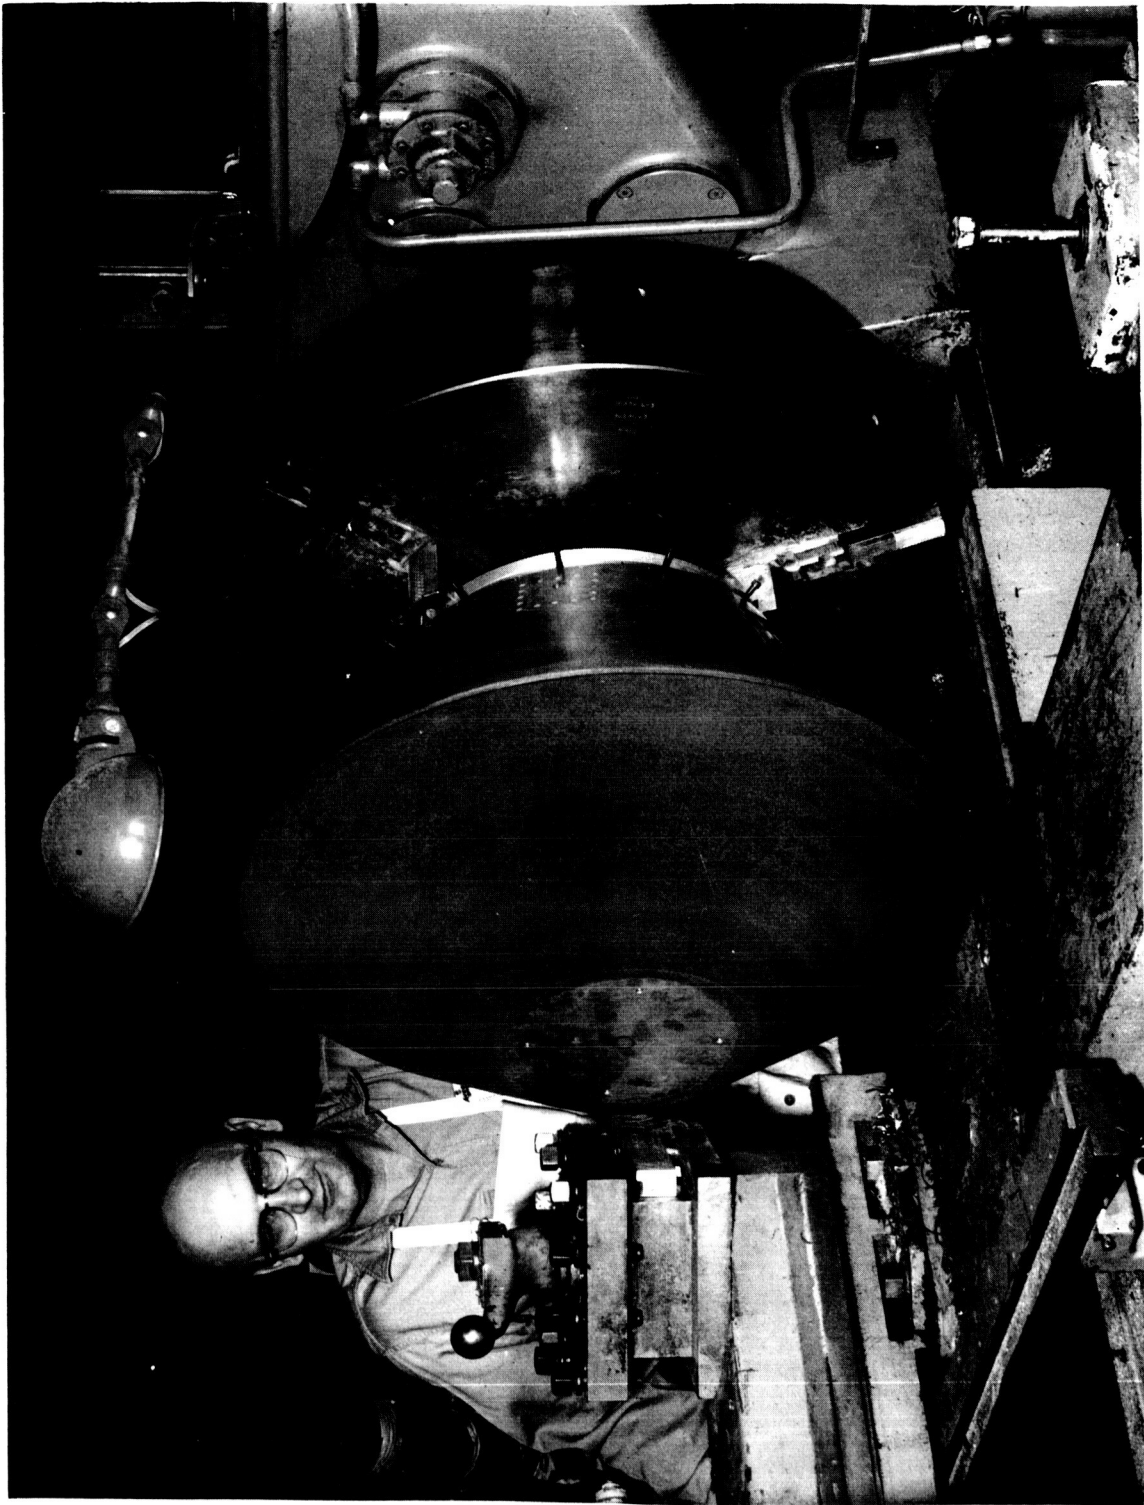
MACHINING PURPLE BLEND HEAT SHIELD
